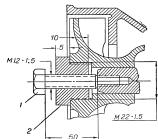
Removing Water Pump Impeller 1 — puller screw, 2 — puller nut. Dimensions are shown in mm.
